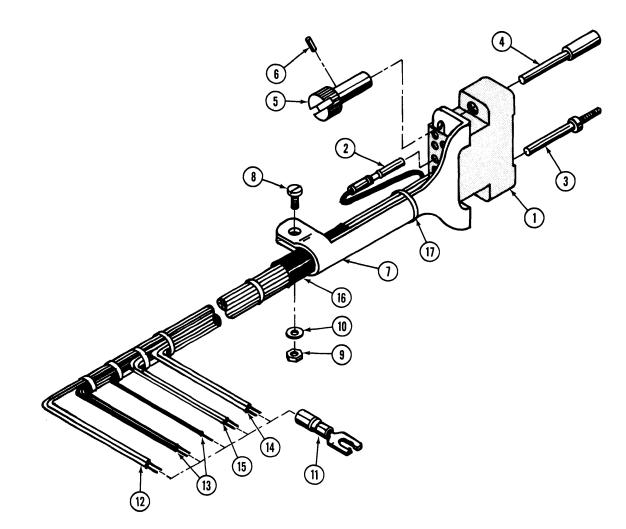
23838 DC POWER CABLE ASSEMBLY
